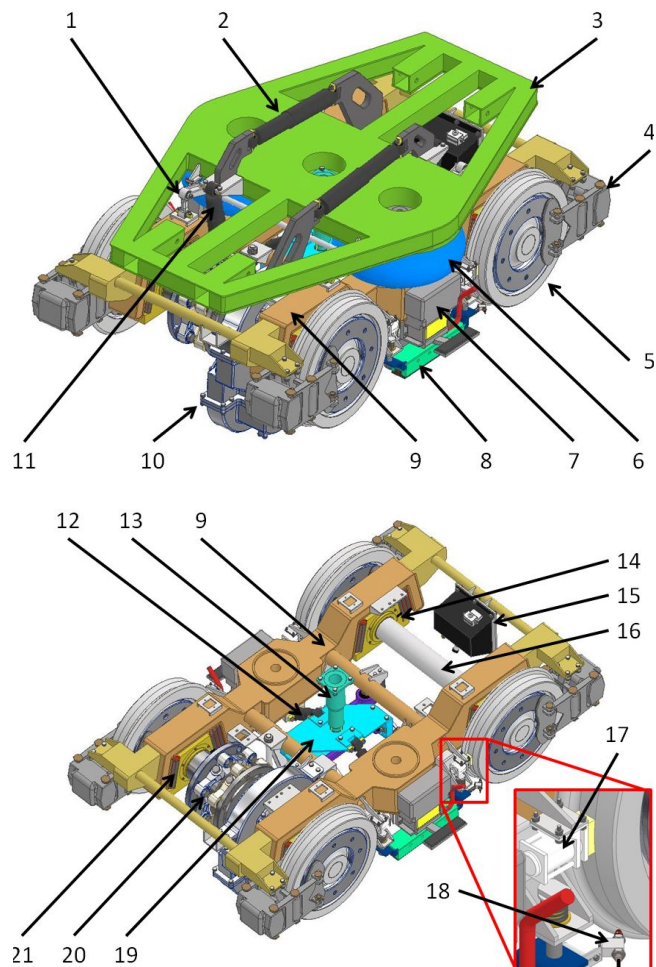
Bogie components [4]: 1. Anti-roll bar; 2. Damper of hunting motion; 3. Suspension frame; 4. Disc brake unit; 5. Wheelset; 6. Air spring; 7. Current collector; 8. Magnetic track brake; 9. Bogie frame; 10. Mechanical gear; 11. Vertical damper; 12. Horizontal damper; 13. Centre pivot; 14. Axlebox; 15. Grease reservoir; 16. Axle of the wheelset; 17. Wheel tread cleaning unit; 18. Lubrication nozzle; 19. Watts linkage; 20. Coupling; 21. Chevron spring
